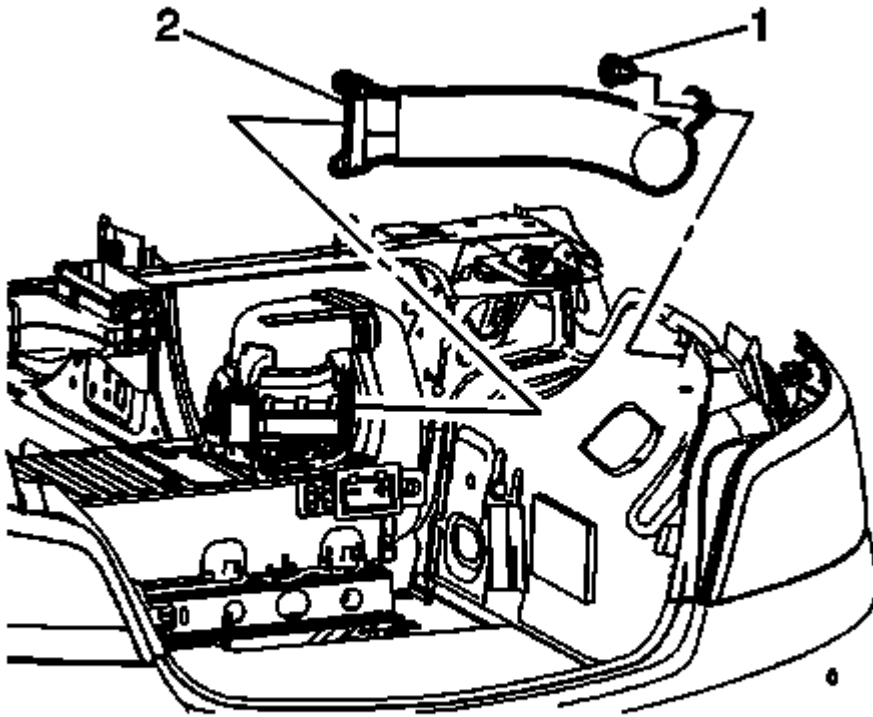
Drive Motor Battery Cooling Air Outlet Duct
